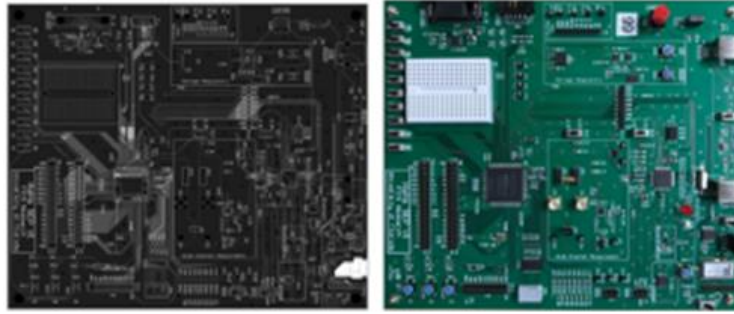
(a) Traces of PCB. (b) PCB.
